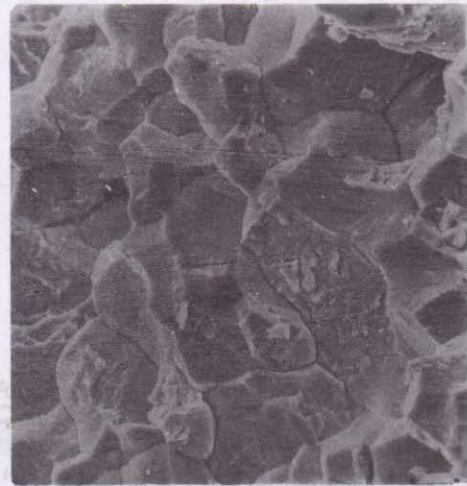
Intergranular fracture in stress corrosion cracking.
